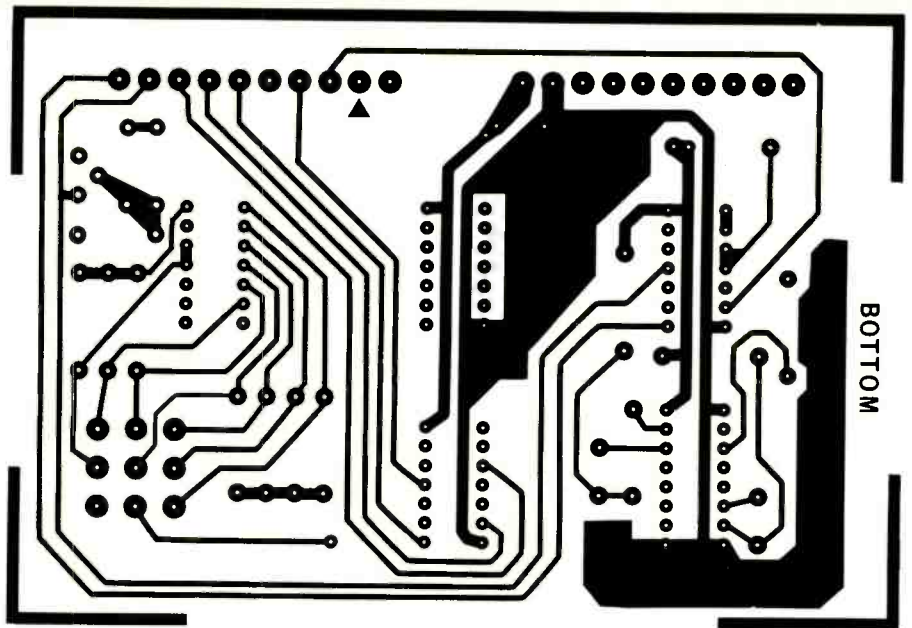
FOIL PATTERN of foil side of double-sided board shown full size.
